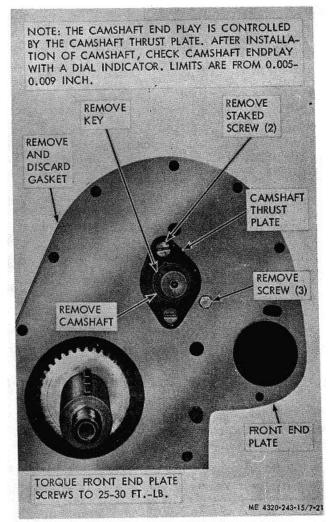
Front end plate, camshaft thrust plate and camshaft, removal and installation
